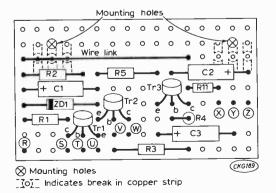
The component layout on Veroboard. The only breaks in the copper strip are those near the mounting holes.
